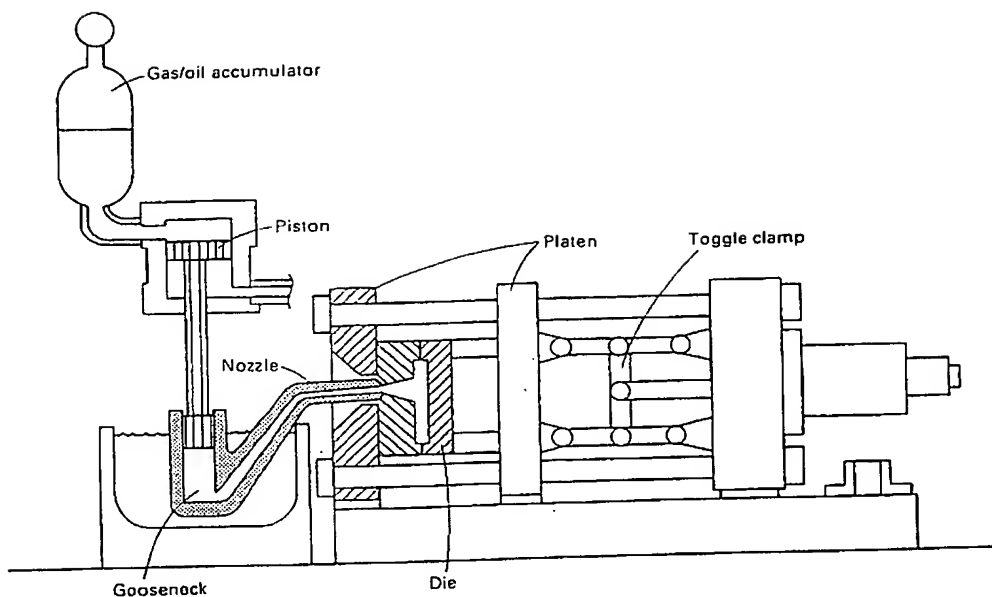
Schematic showing the principal components of a hot chamber die casting machine
